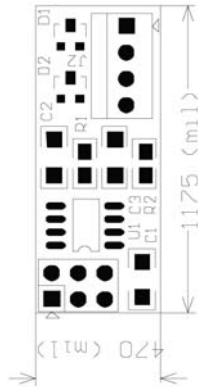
SSADC-ADDON Board Mounting Hole Outline
